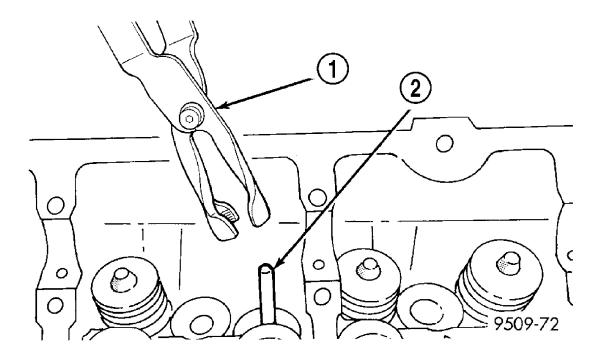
Removing/Installing Valve Stem Seal Courtesy of CHRYSLER LLC
